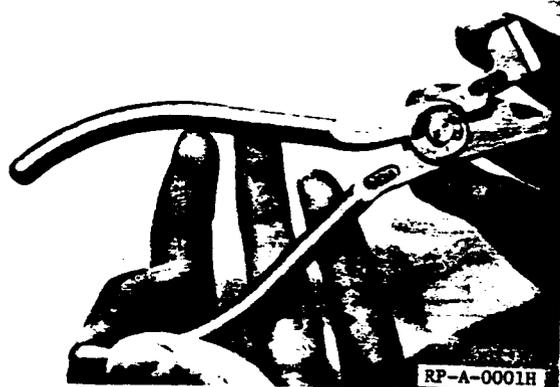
R-4775 SINGLE WIRE SEATING TOOL (PAR. 3.2.1.1.3)
